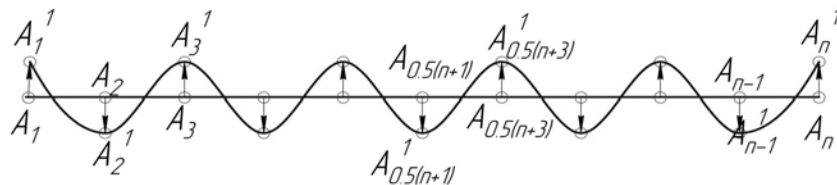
The scheme of the sheet form changes in the process of stamping.
